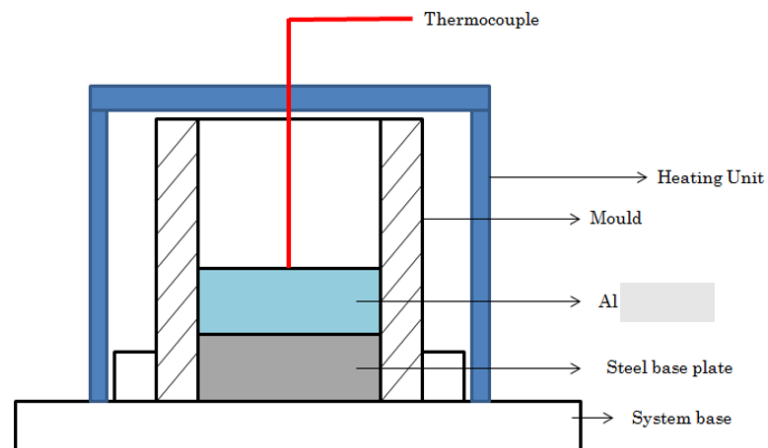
(a) – Diagram showing the set-up of the squeeze casting mould during the pre-heating stage
